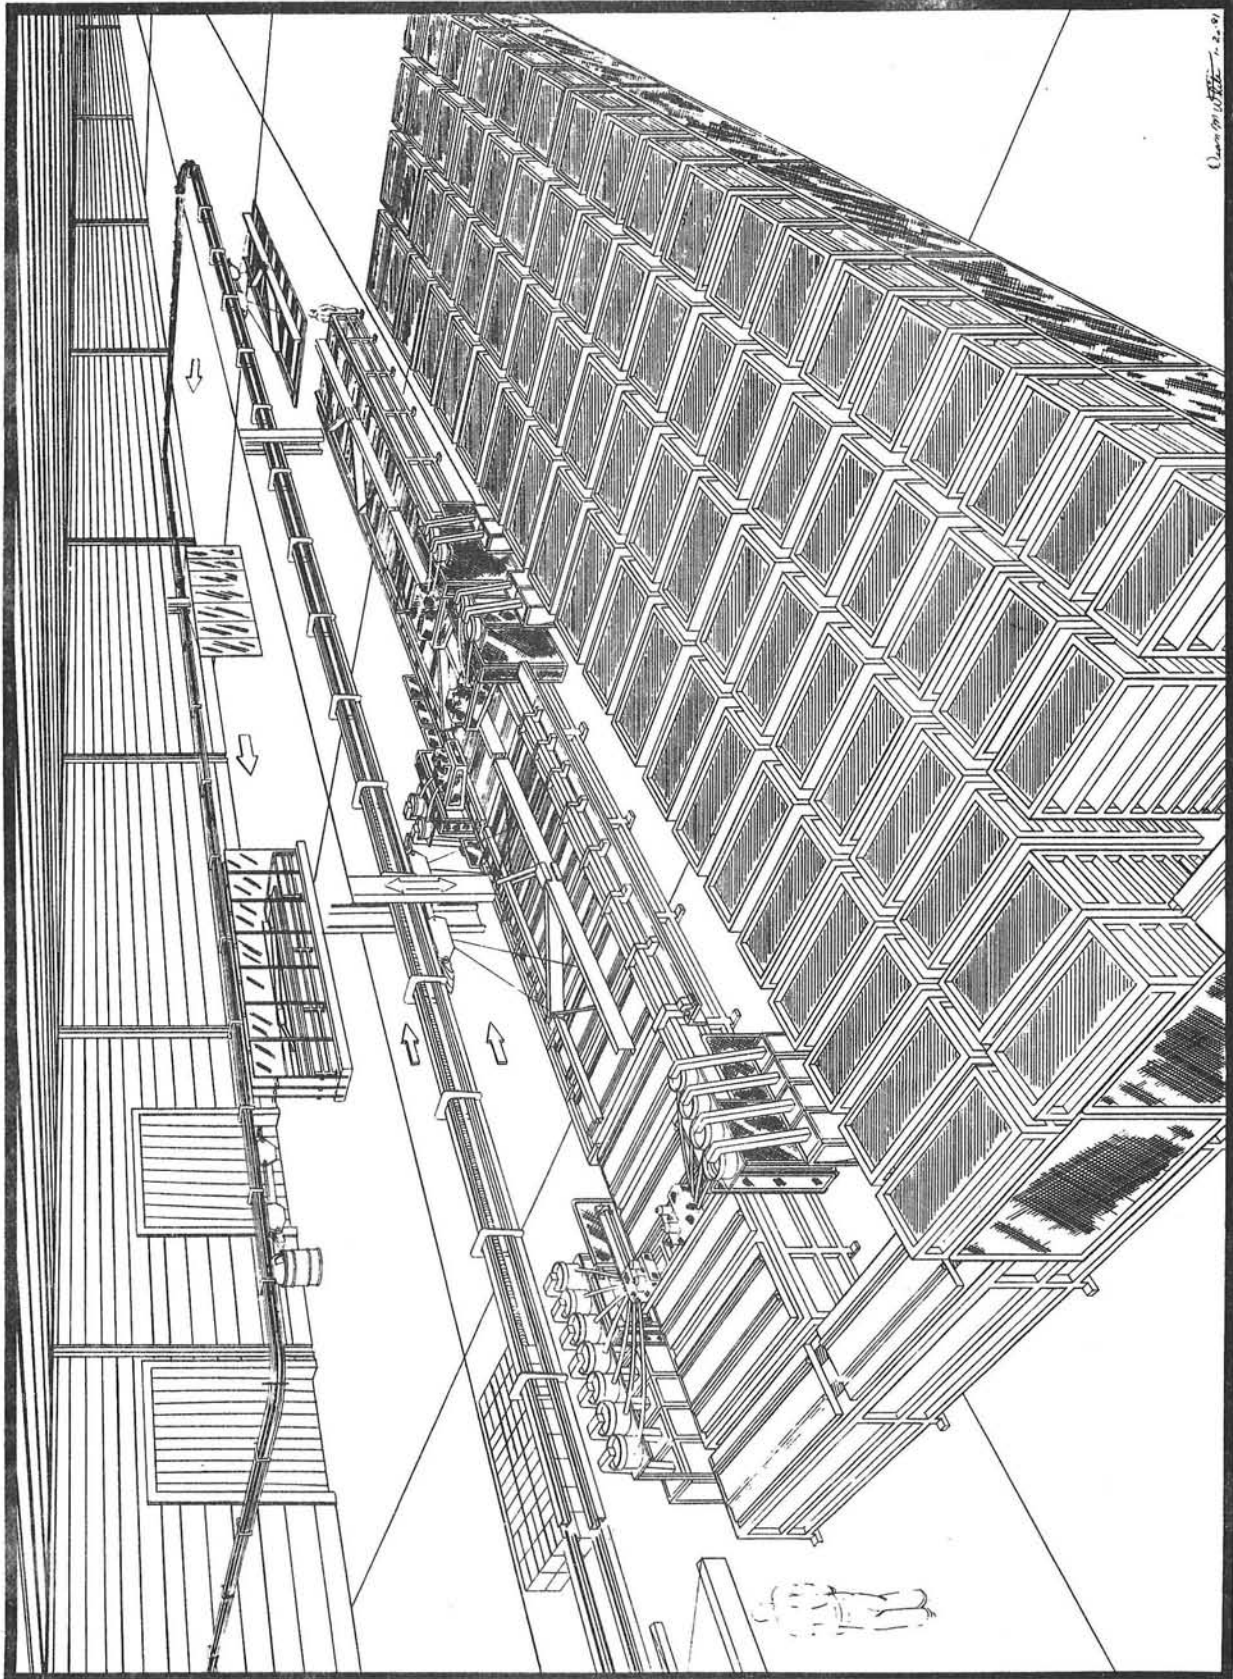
REFLECTOR FINAL ASSEMBLY LINE
